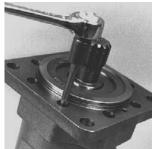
Remove Screws Holding Flange (SAE) to Housing (SAE)
